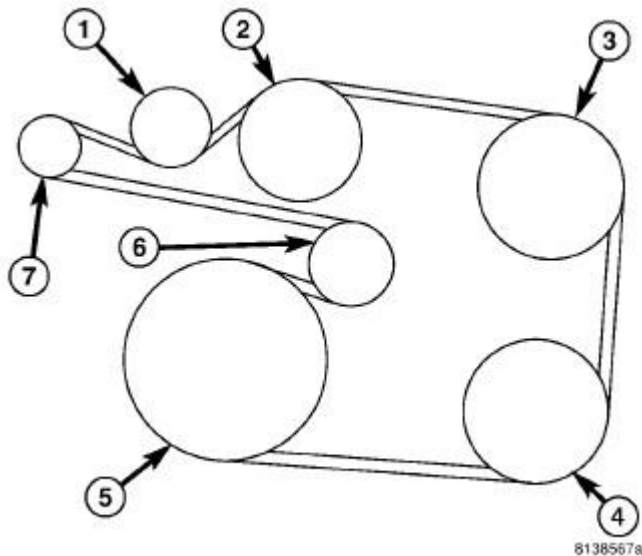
5.7L ENGINE ACCESSORY DRIVE BELT ROUTING
